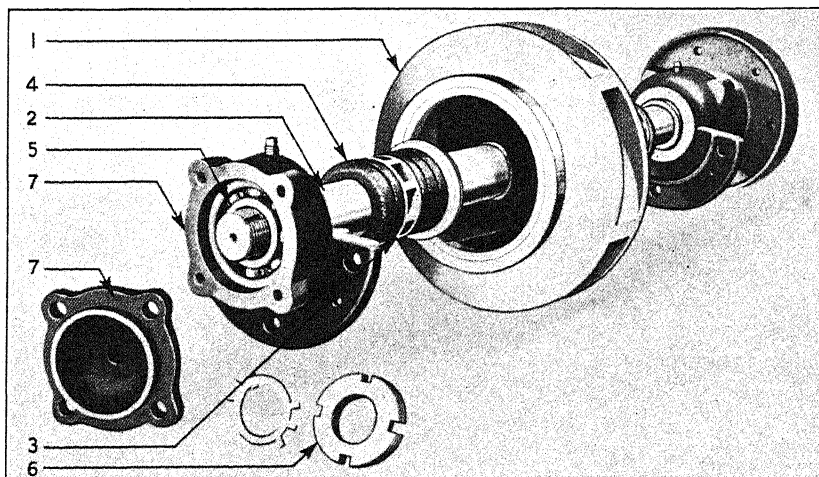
Impeller and shaft assembly of pumps showing: (1) enclosed impeller; (2) ground carbon-steel shaft; (3) water seal ring; (4) packing; (5) standard ball bearing; (6) lock nut and (7) ball-bearing housing and cover. (Courtesy: Fairbanks-Morse Company.)
